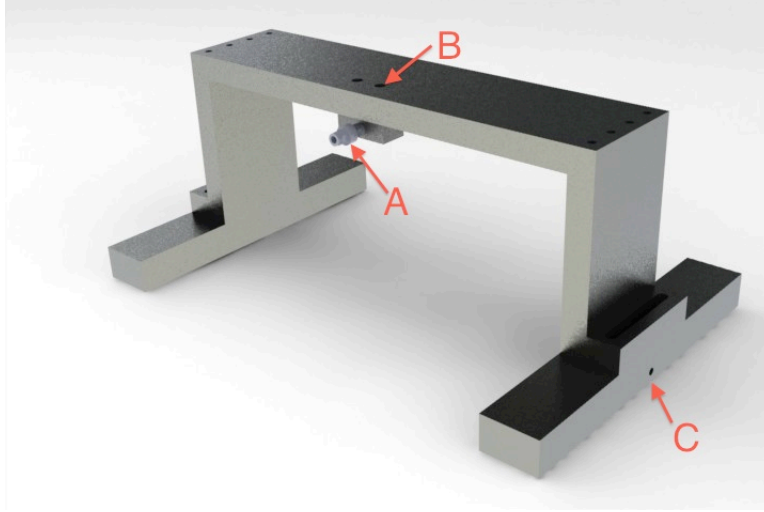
Bracket assembly of test setup. Feature A illustrates the load cell used to hold the ball bearing in position. Feature B shows thru holes that were specifically made oversized to allow for alignment adjustments.
